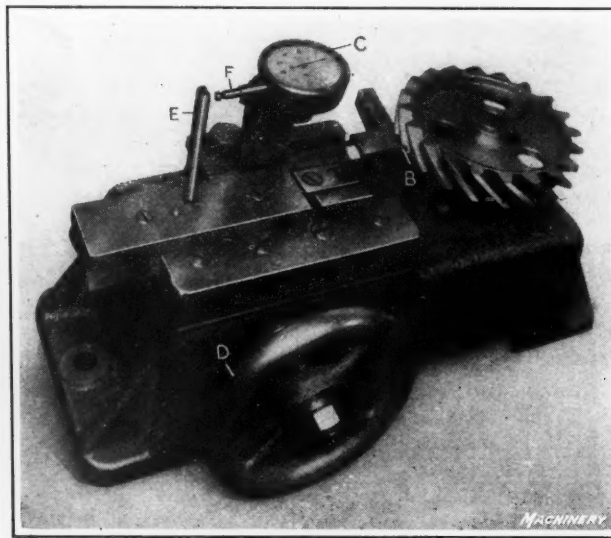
Fixture used for testing Pitch Diameter, Concentricity of Pitch Circle, and Tooth Thickness of Oil-pump Shaft Spiral Gears
